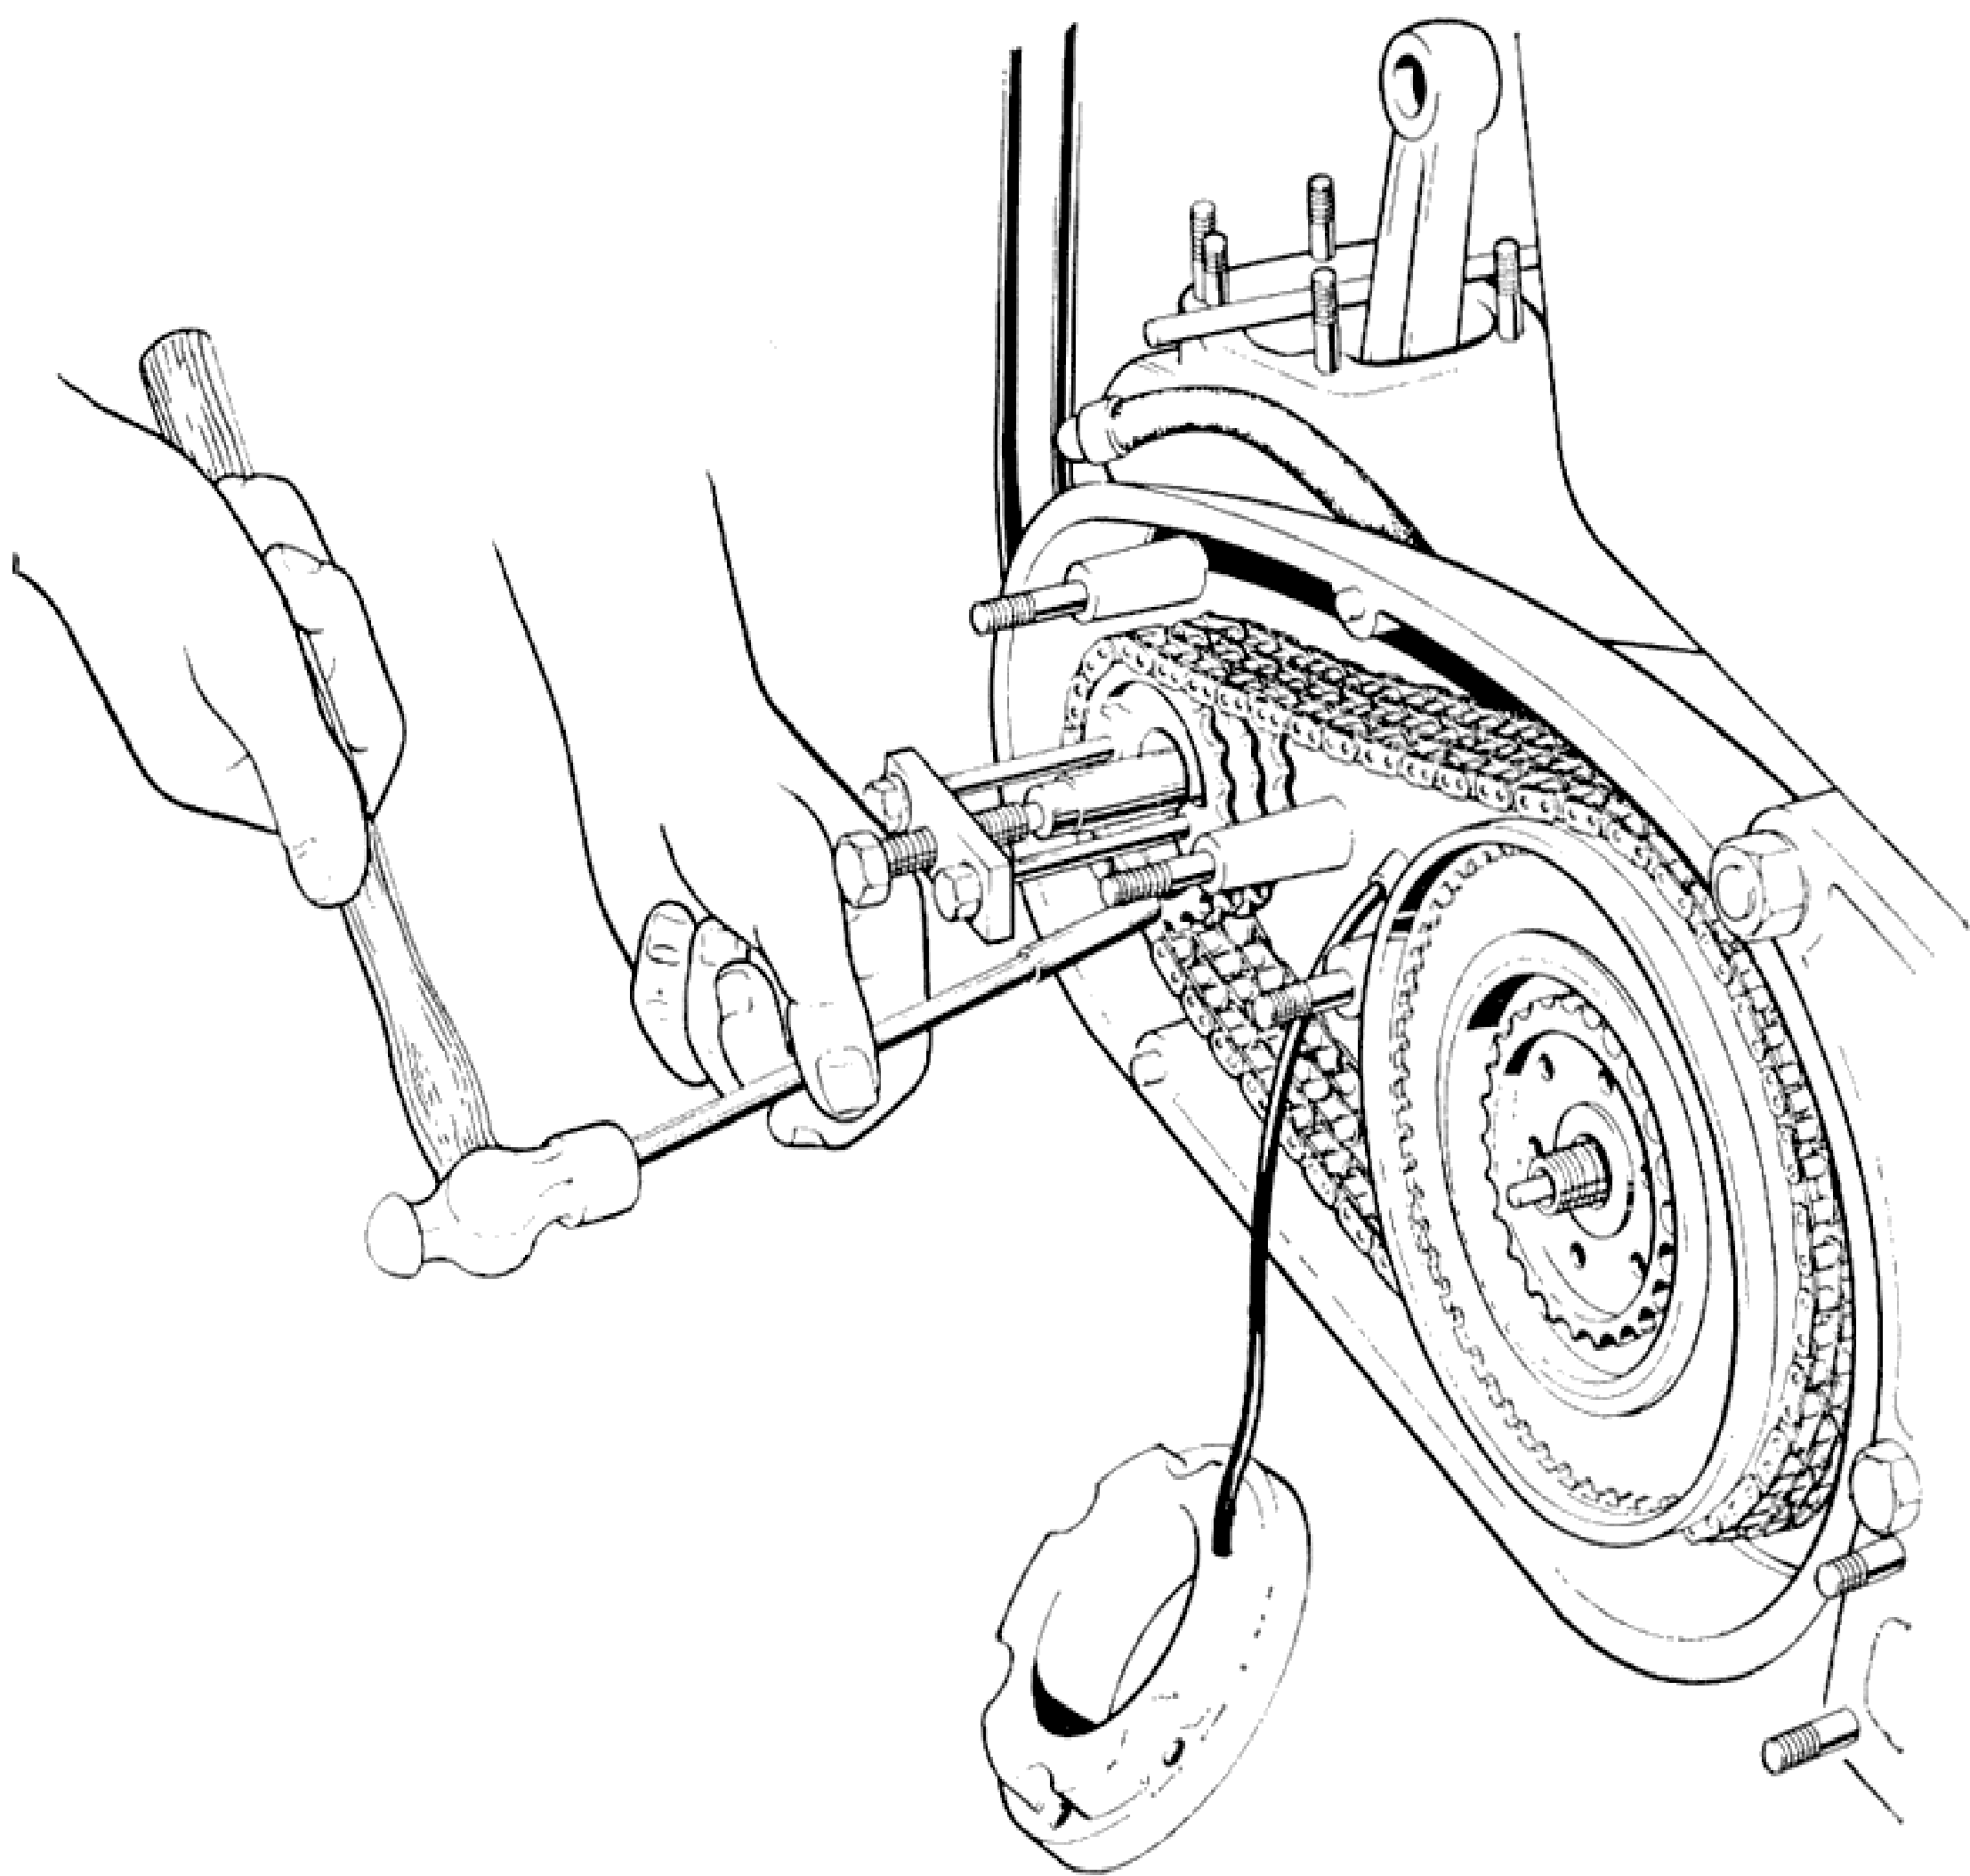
Diaphragm spring compressor tool 060999 in use
